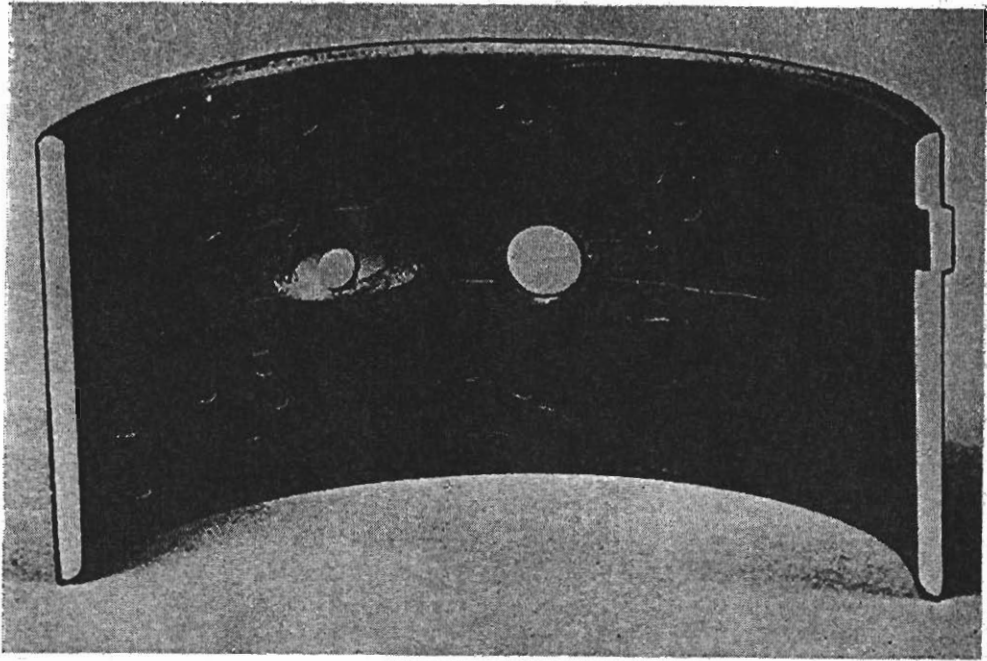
The Intricate Pattern of Tiny Surface Cracks Is Characteristic of This Type Bearing Shell After Use.
